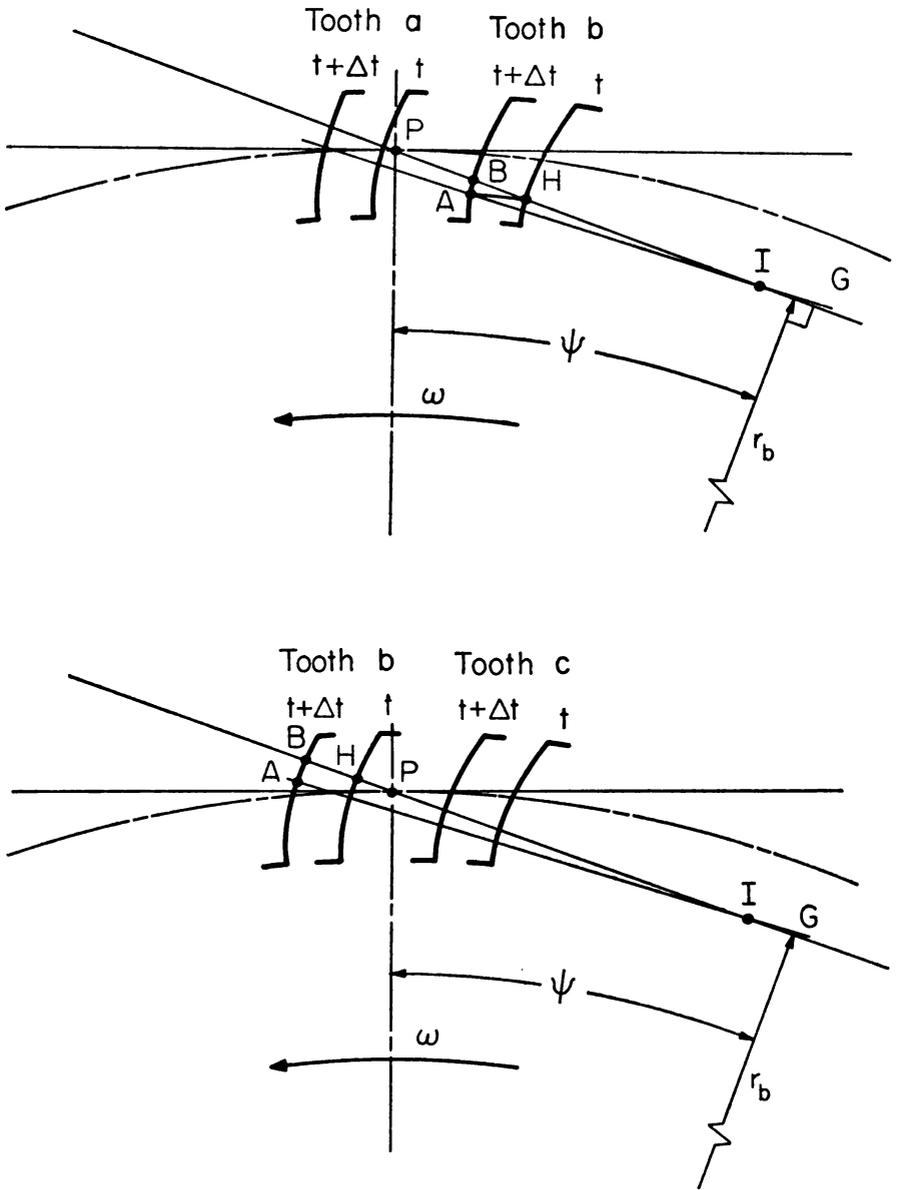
Positions of tooth "b" during the engagement cycle; Upper: tooth "b" in approach; Lower: "b" in recess.
